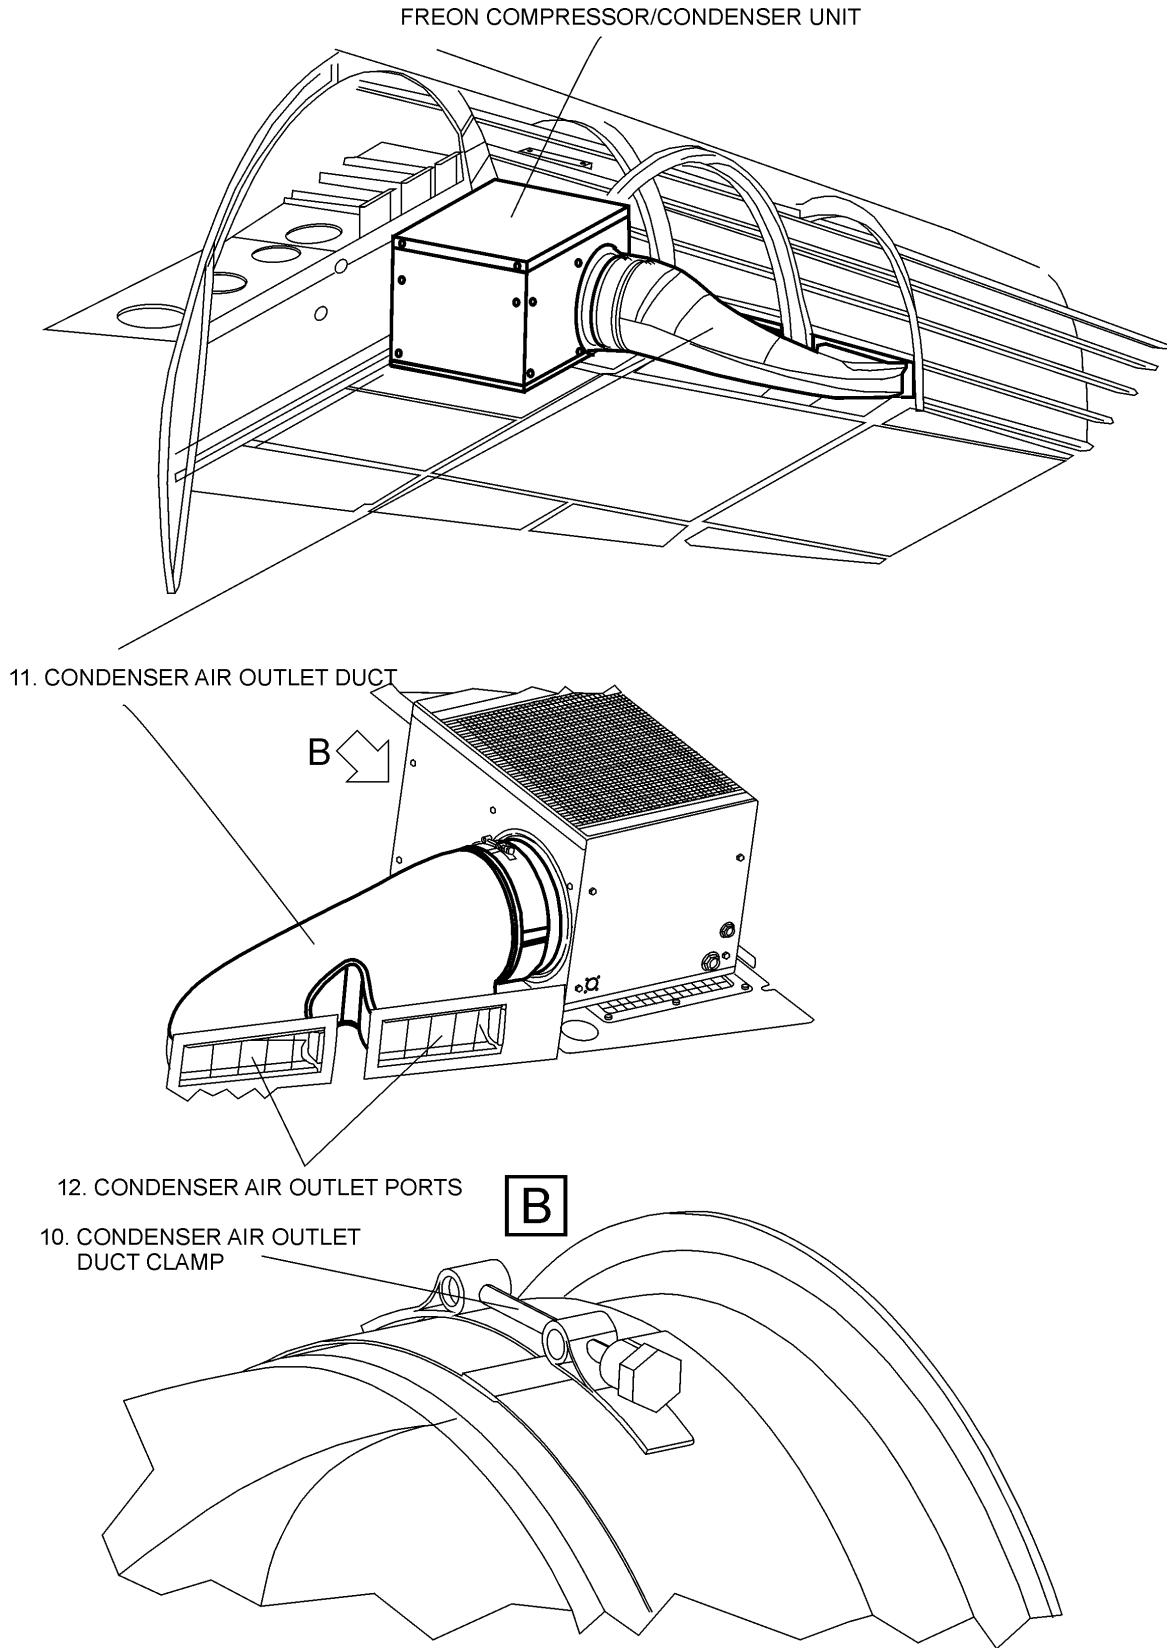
Compressor/Condenser - Removal/Installation (Sheet 3 of 6)
